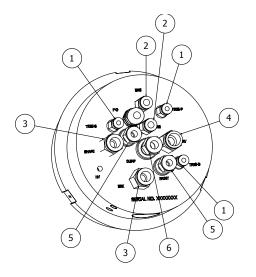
MCV Mounting Manifold Fitting Selection (Metric/Fractional)
